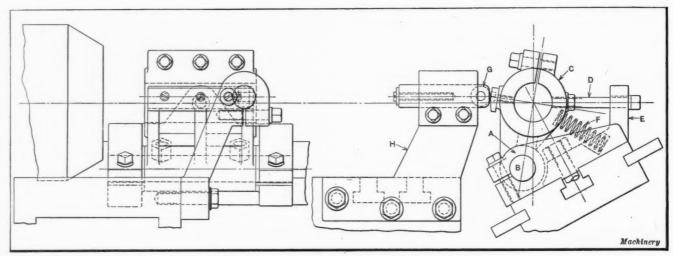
Another Type of Internal Necking or Recessing Tool-holder
